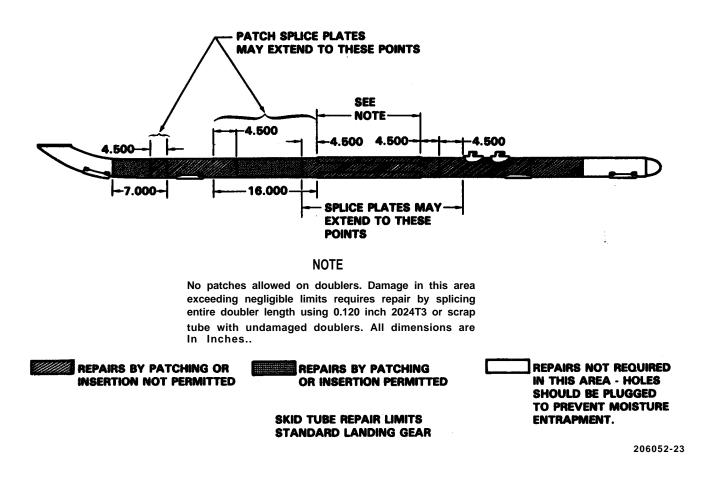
Standard Landing Gear - Skid Tube Repair Limits
